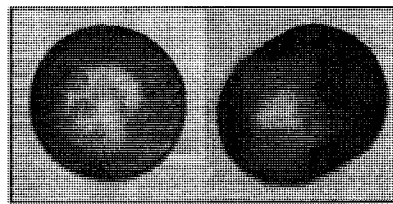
Sample of two micro-holes. Deformed micro-hole because of the tool bending (right) and well-defined circular (left).
